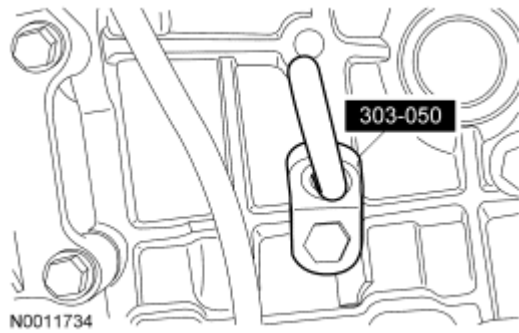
Installing Special Tool (303-050) To Threaded Hole Located At LH Side Of Engine Block
